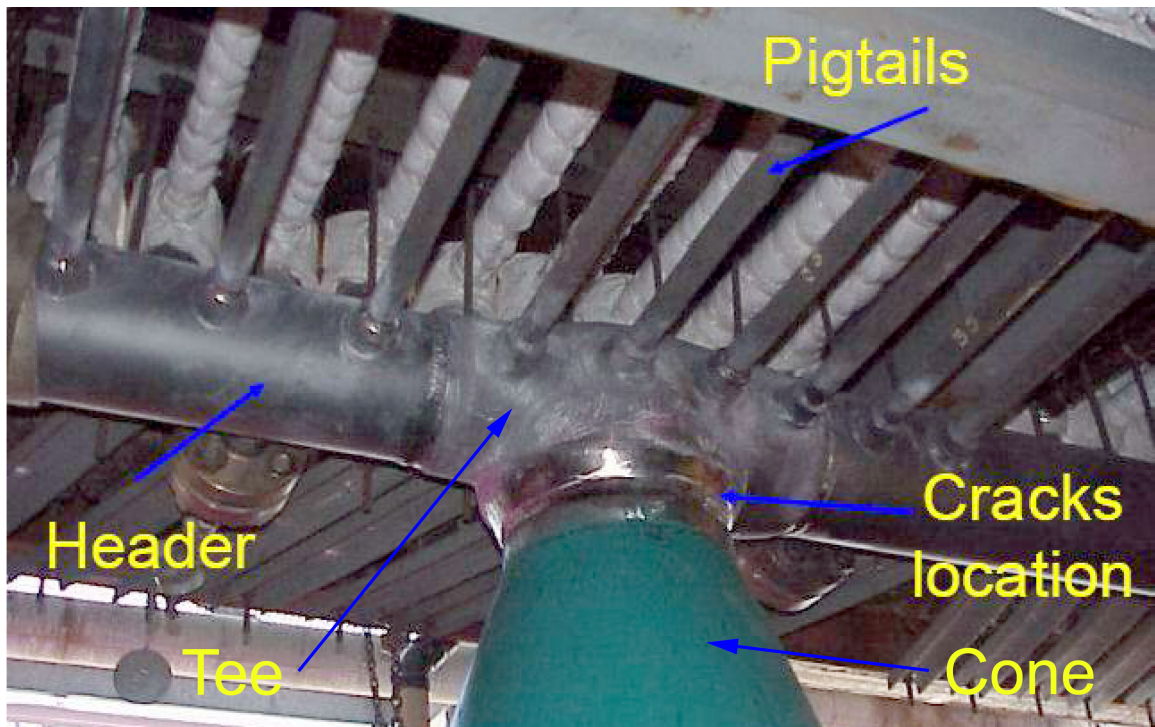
Photograph of the outlet side of a reformer furnace, showing the outlet pigtails from the reformer catalyst tubes and the outlet header, tee, and cone which connect to the refractory-lined transfer system. From Penso and Mead [3].
